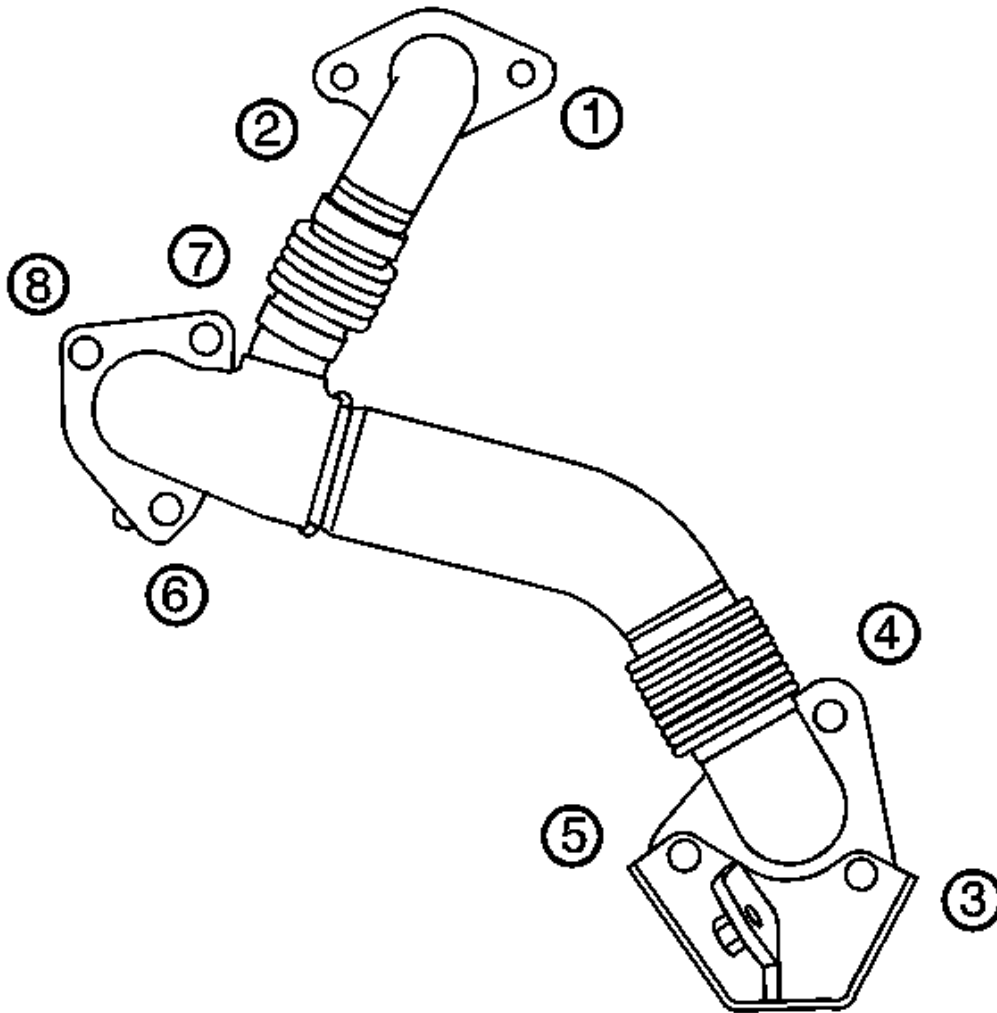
Exhaust Pipe Bolts Removal Sequence
